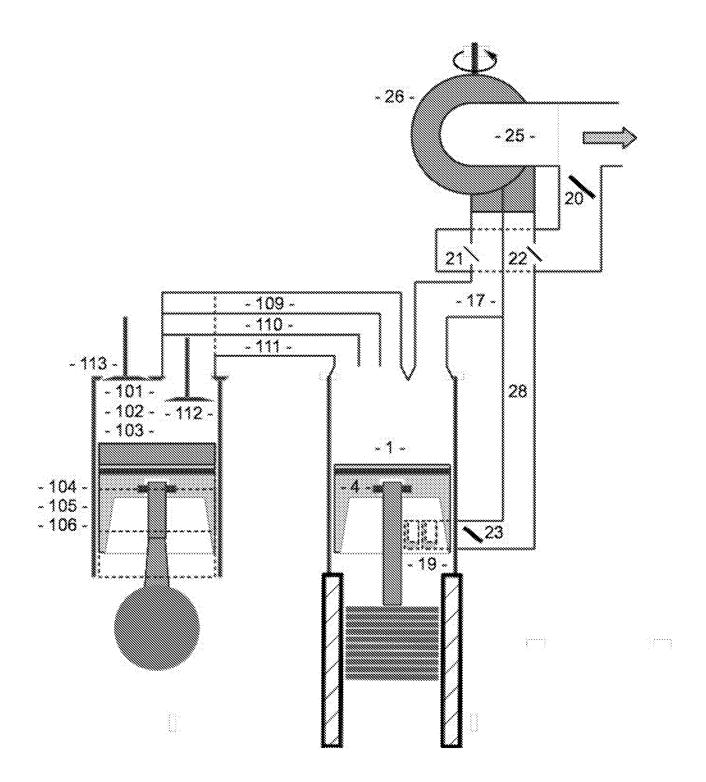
Free piston variant with 3+1 cylinders. This variant comprises 3 combustion pistons connected to a normal crankshaft and 1 exhaust piston connected to a linear engine/generator.
